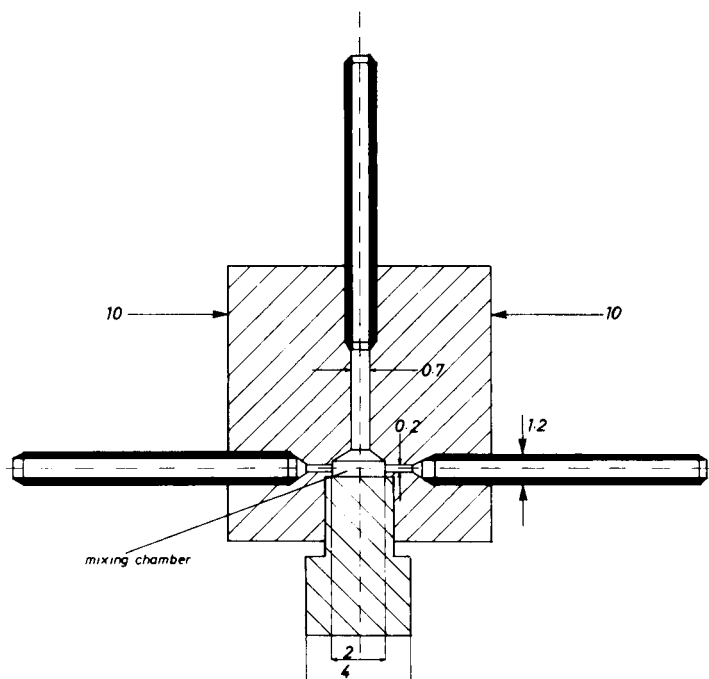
Mixing cell (longitudinal section) made of plexiglas or Kel-F, with tubules of stainless steel. Dimensions in mm.
